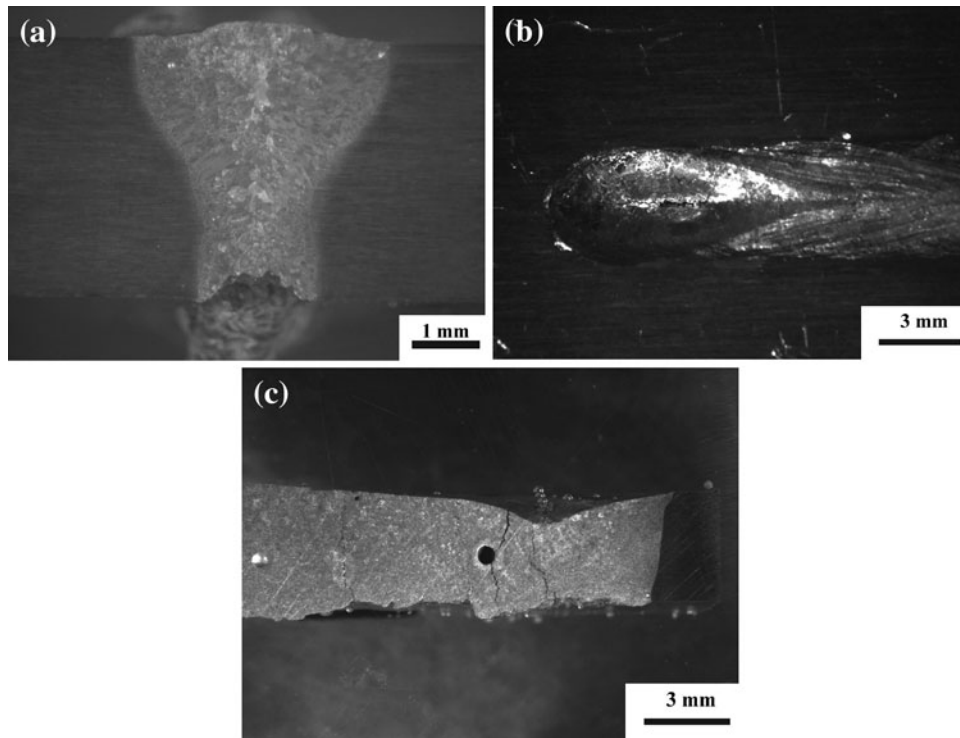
Laser beam weld of Al 2198-T8 for energy deposition of 103 J/mm and beam focal point at top surface of workpiece. (a) Transverse cross section. (b) Top surface of workpiece. (c) Longitudinal cross section at symmetry plane. Beam power and welding speed are 3441 W and 2 m/min, respectively
